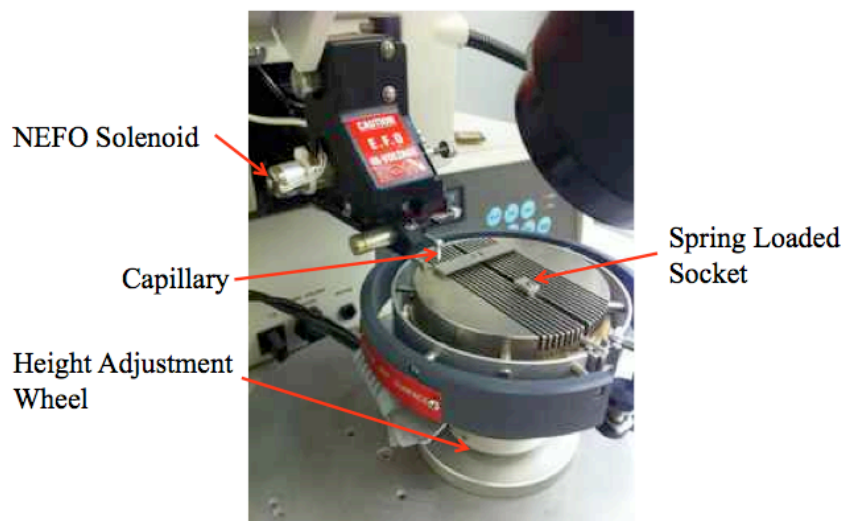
A close up of the wire bonder working assembly is depicted with various components annotated.
